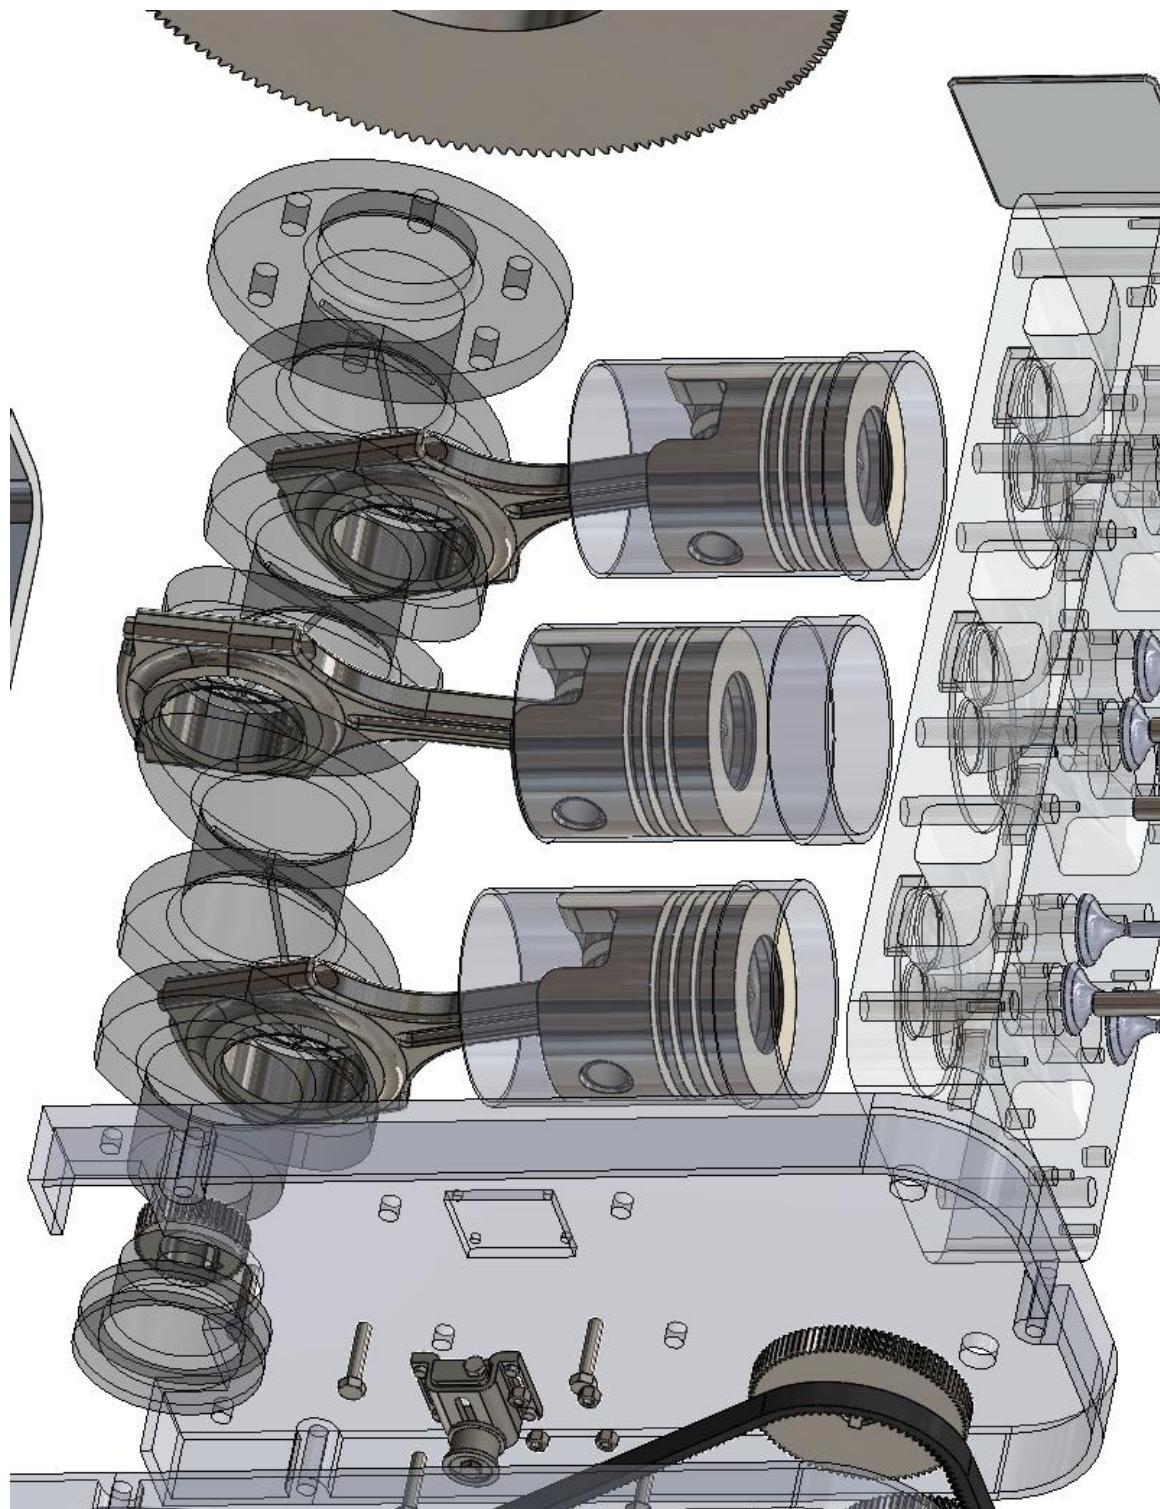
Detailed Exploded View of CAD of The Engine Assembly.
